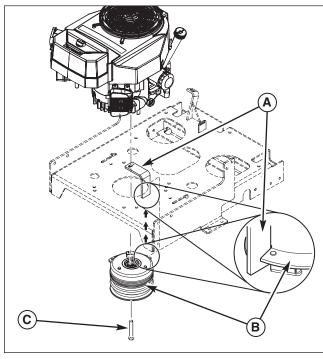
Remove the PTO Clutch A. PTO Clutch Mounting Tab
